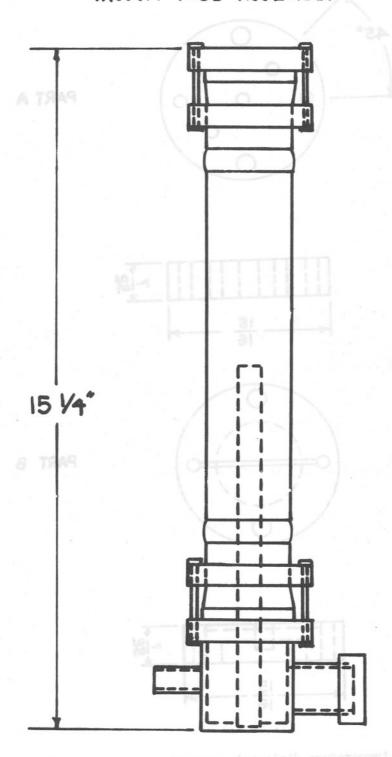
High temperature dielectric measuring setup - vacuum housing assembly.
